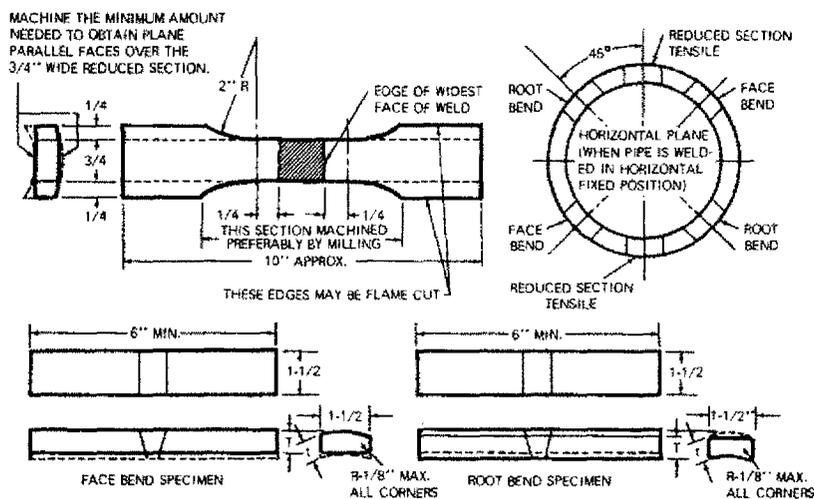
Specification of test specimens for qualifying the pipe welding procedure.
